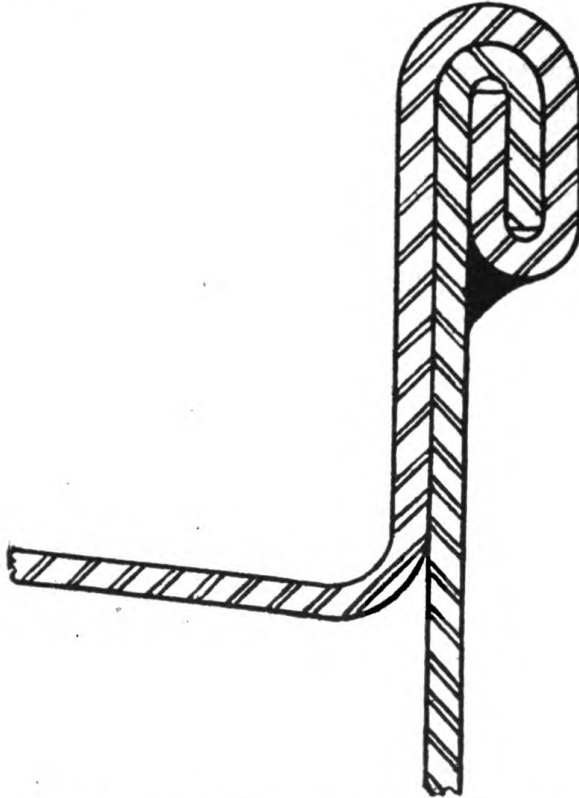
Repair of double-seamed chime by brazing or welding.
